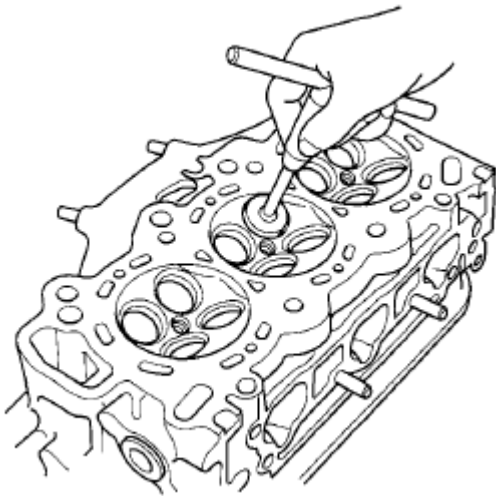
Renewing Valve Seats In Cylinder Head Using Valve Seat Cutter
